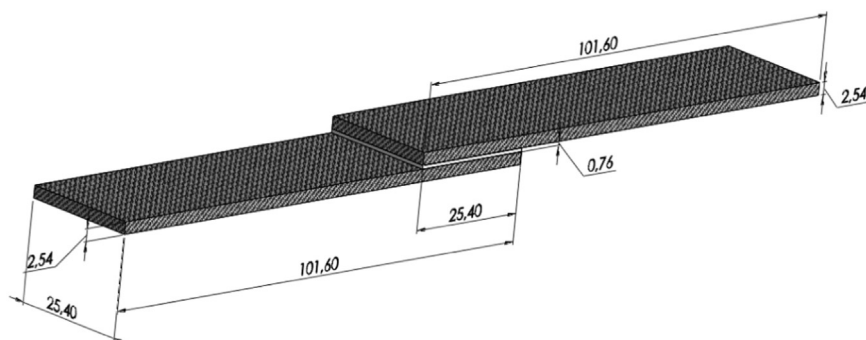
CAD of single-lap joint specimen with related dimensions.
